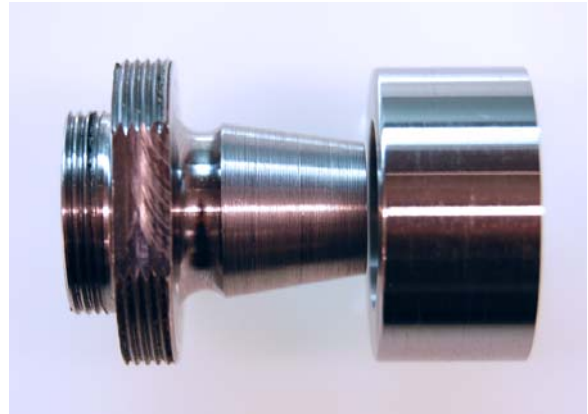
The prototype of the cable gland and the lock ring. The gland is screwed to the motor junction box and the outer covering (not shown) is screwed to the gland. Both parts can be tightened using standard wrench sizes.
